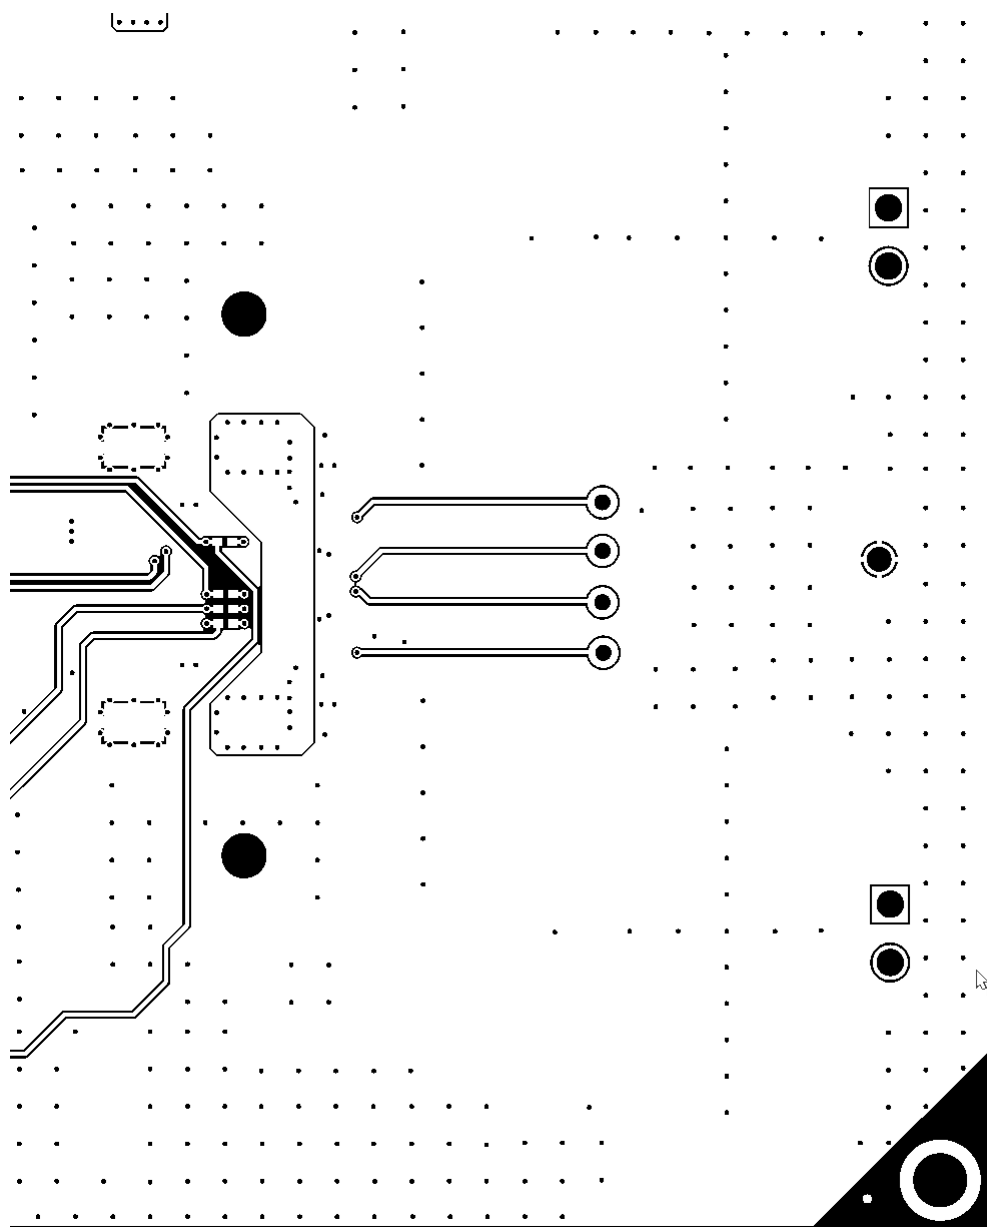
2.0 (Stereo BTL) PCB Bottom Layer Plot (Top View)
